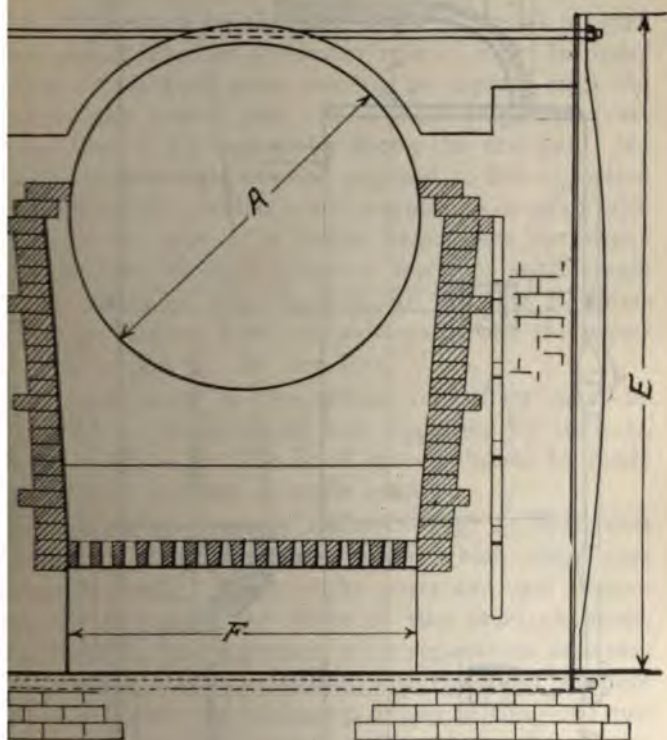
shows the complete settings of a horizontal tubular boiler with a down draft furnace.
